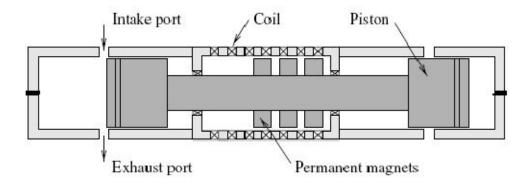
Illustration of the Free Piston Engine Generator [28]
